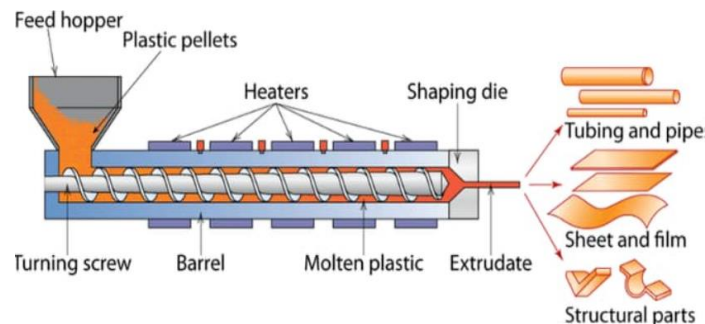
Extrusion molding (Chans Machining, 2024).
